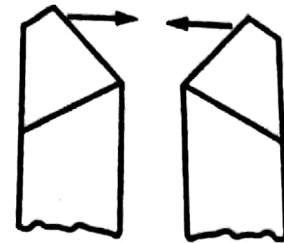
Left Hand and Right Hand Facing Tools
